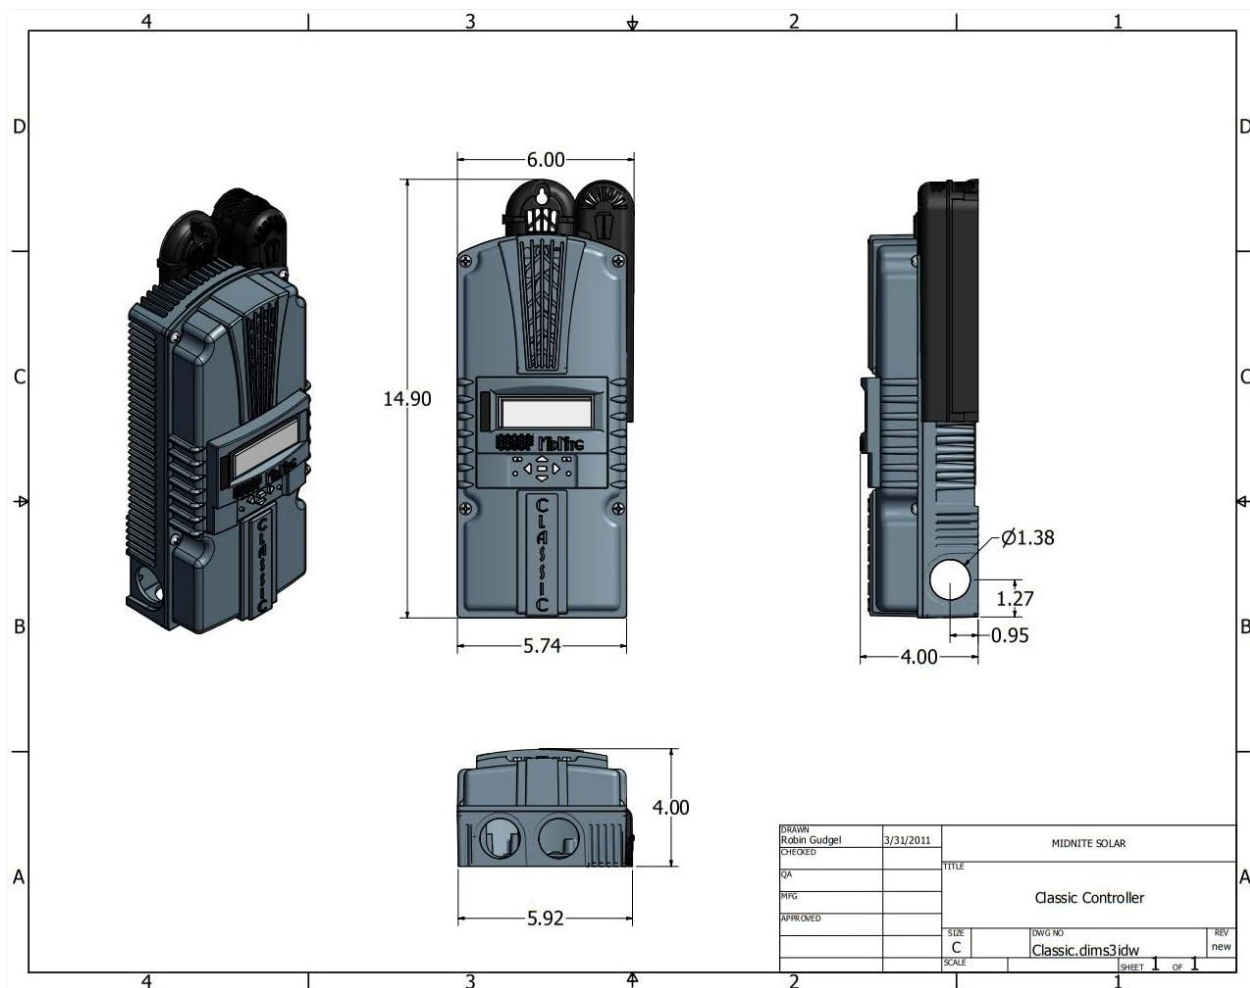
Technical drawing showing the dimensions of the Classic charge controller.
